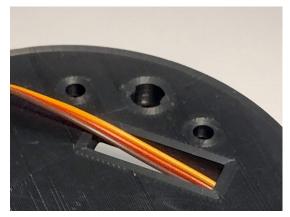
3D Printed Top Part of the Master Side Interface.
